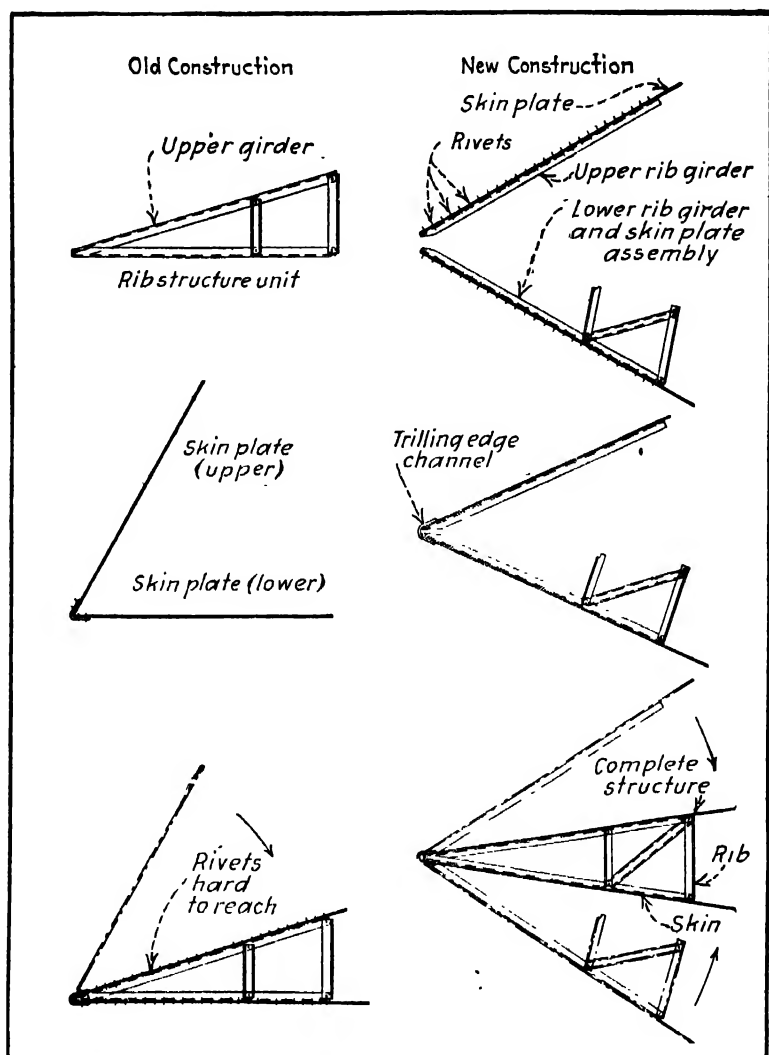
Principles of Construction Used in Rohrbach Control Surfaces to Facilitate Manufacture and Reduce Costs of All Metal Structures.
